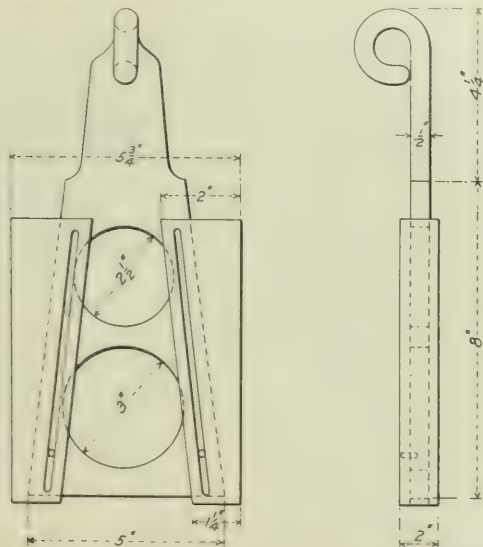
Details of Expanding Wedge Used in Handling Driving Boxes.
